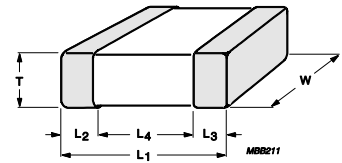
Surface mounted multilayer ceramic capacitor dimension
